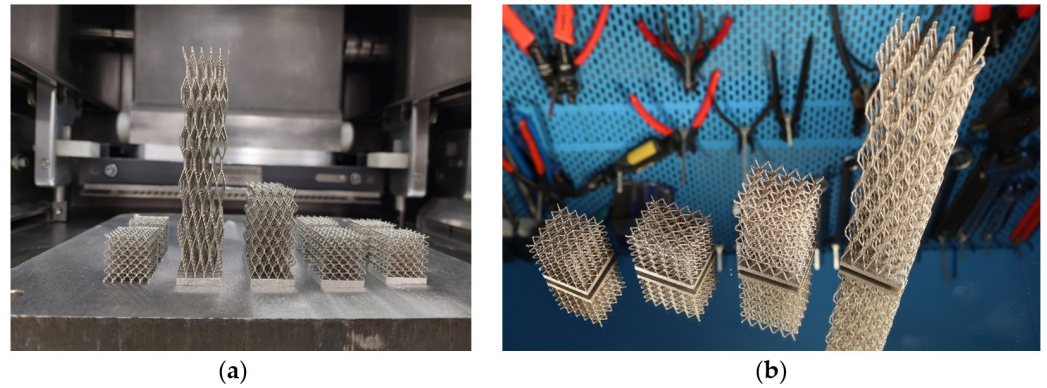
Manufactured lattice structures: (a) inside the RenAM-400 PBF-LB machine attached to the printing plate; (b) final components removed from the plate.
